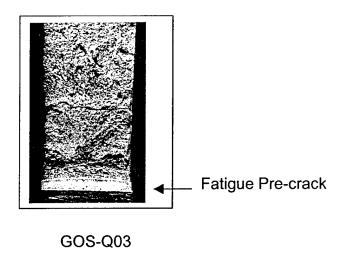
Typical fatigue pre-crack on short crack SE(B) specimen.
